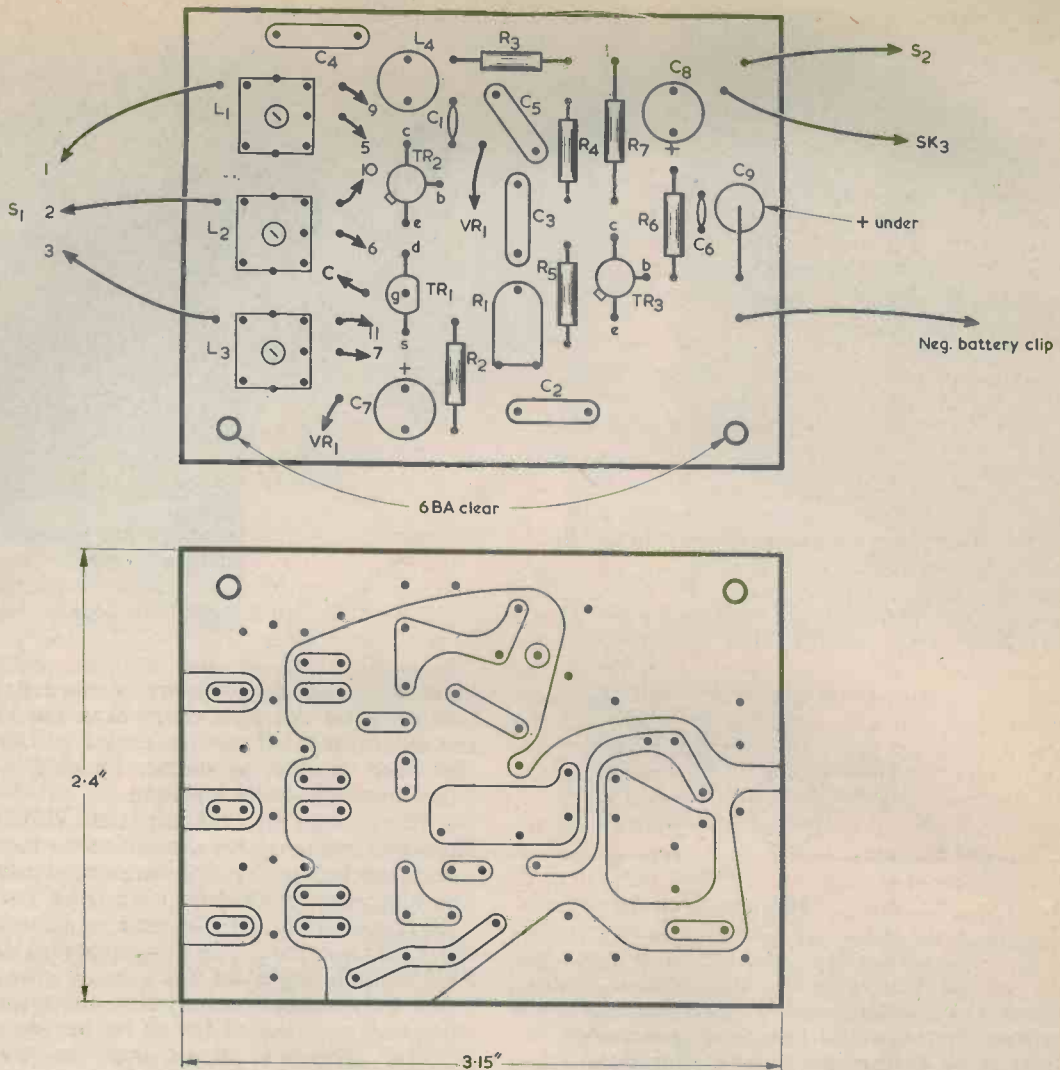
The printed circuit board, reproduced actual size. The letter and number references indicate connections to the front panel components shown in Fig. 4
